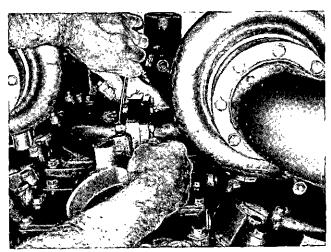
(V41931) Tightening turbocharger mounting nuts
